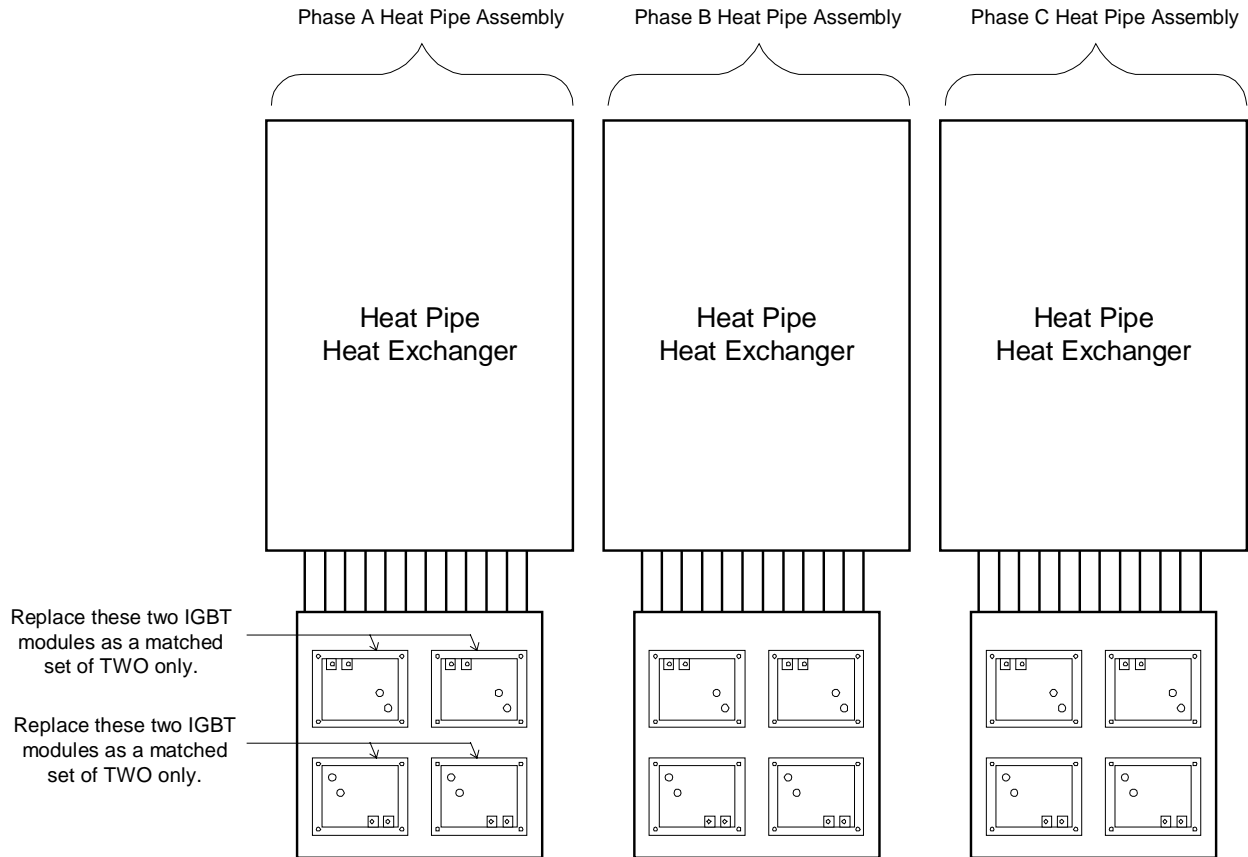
IGBT Module Location in 1000 Frame Heat Exchanger Assembly
